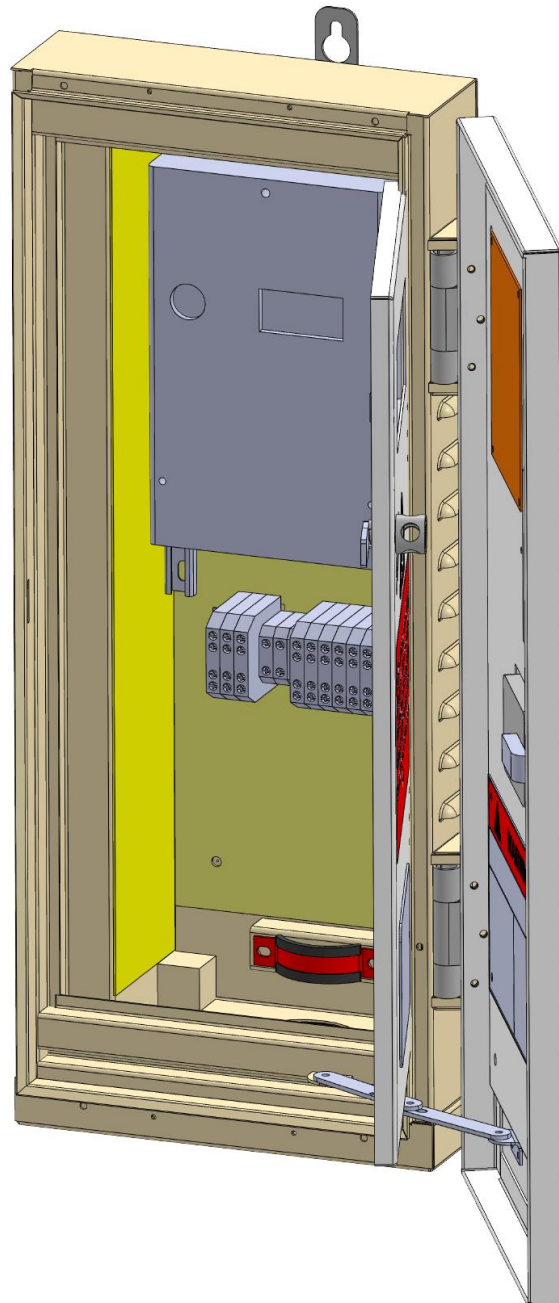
Layout Drawing of Remote Meterbox with Steel Enclosure with Main Door Opened
